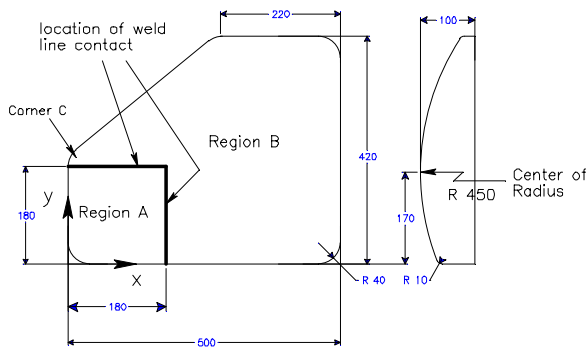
Punch geometry and initial weld line position on punch surface. Dimensions in mm.
